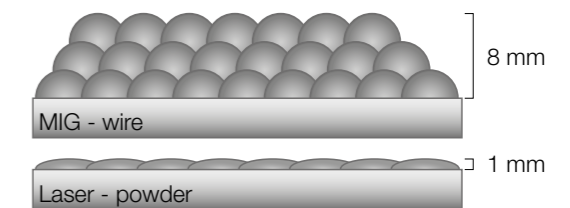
Laser cladding requires less machining than MIG/GMAG to reach final dimensions after deposition. This is due to the bead form or shape and the overlap.
